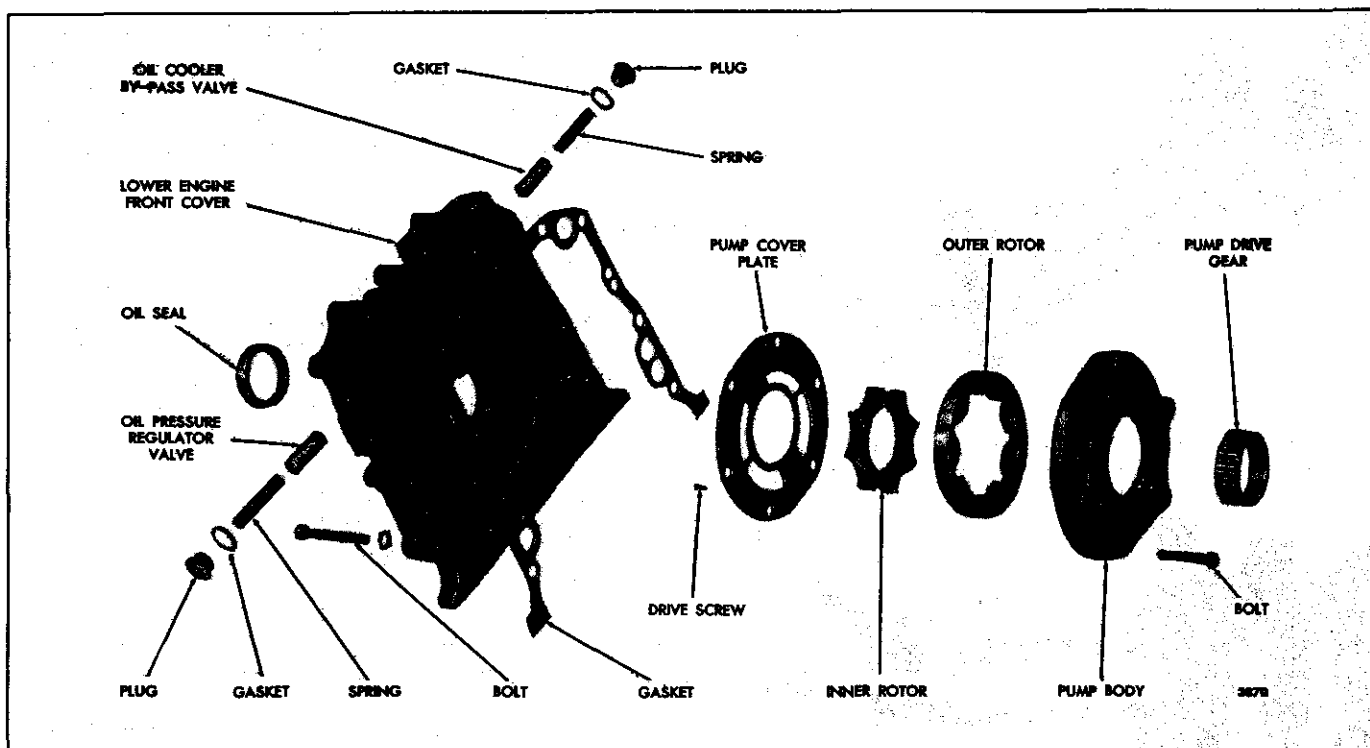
Oil Pump Details and Relative Location of Parts (Current)
